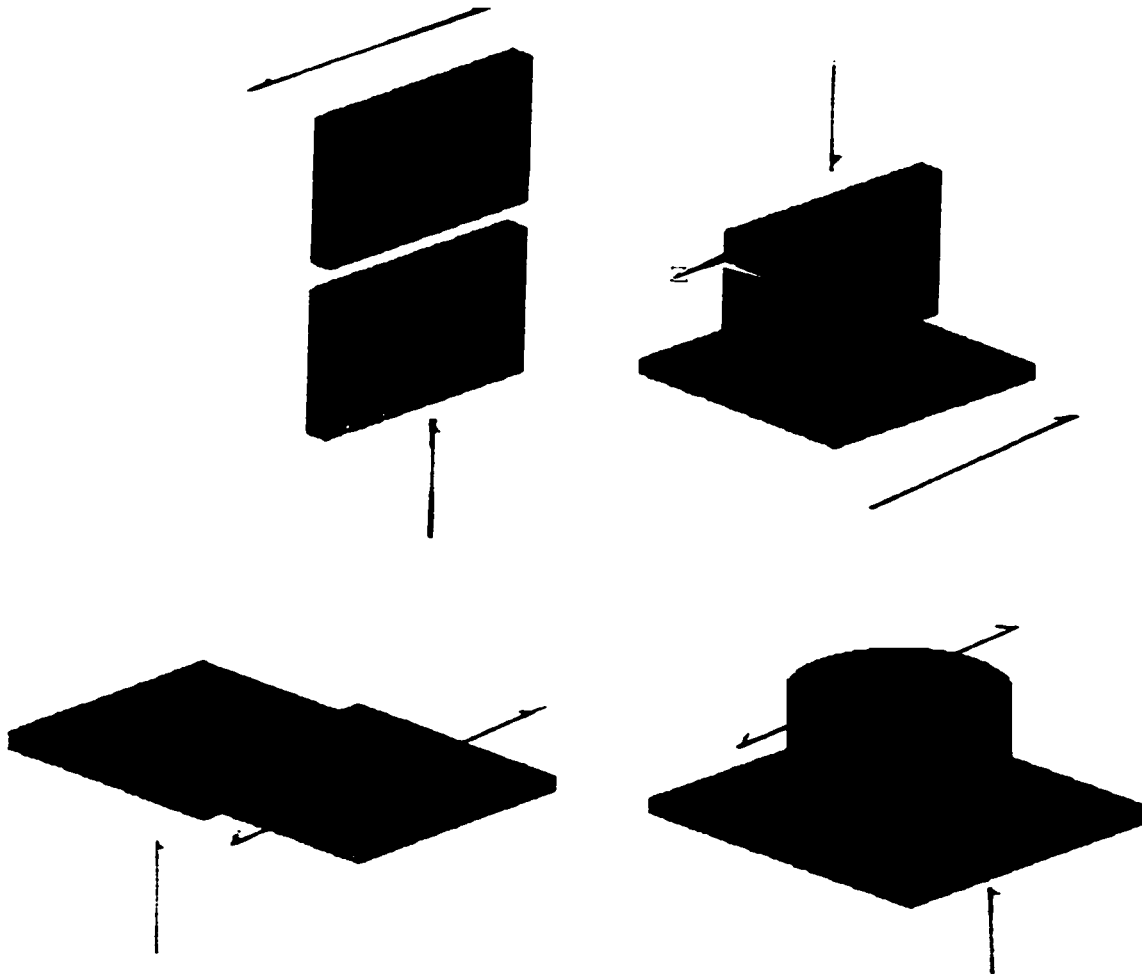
The four different weld geometries are, from the upper left in clockwise order: butt weld, T-joint weld, cup welded to flange (CWF), shear lap weld.
